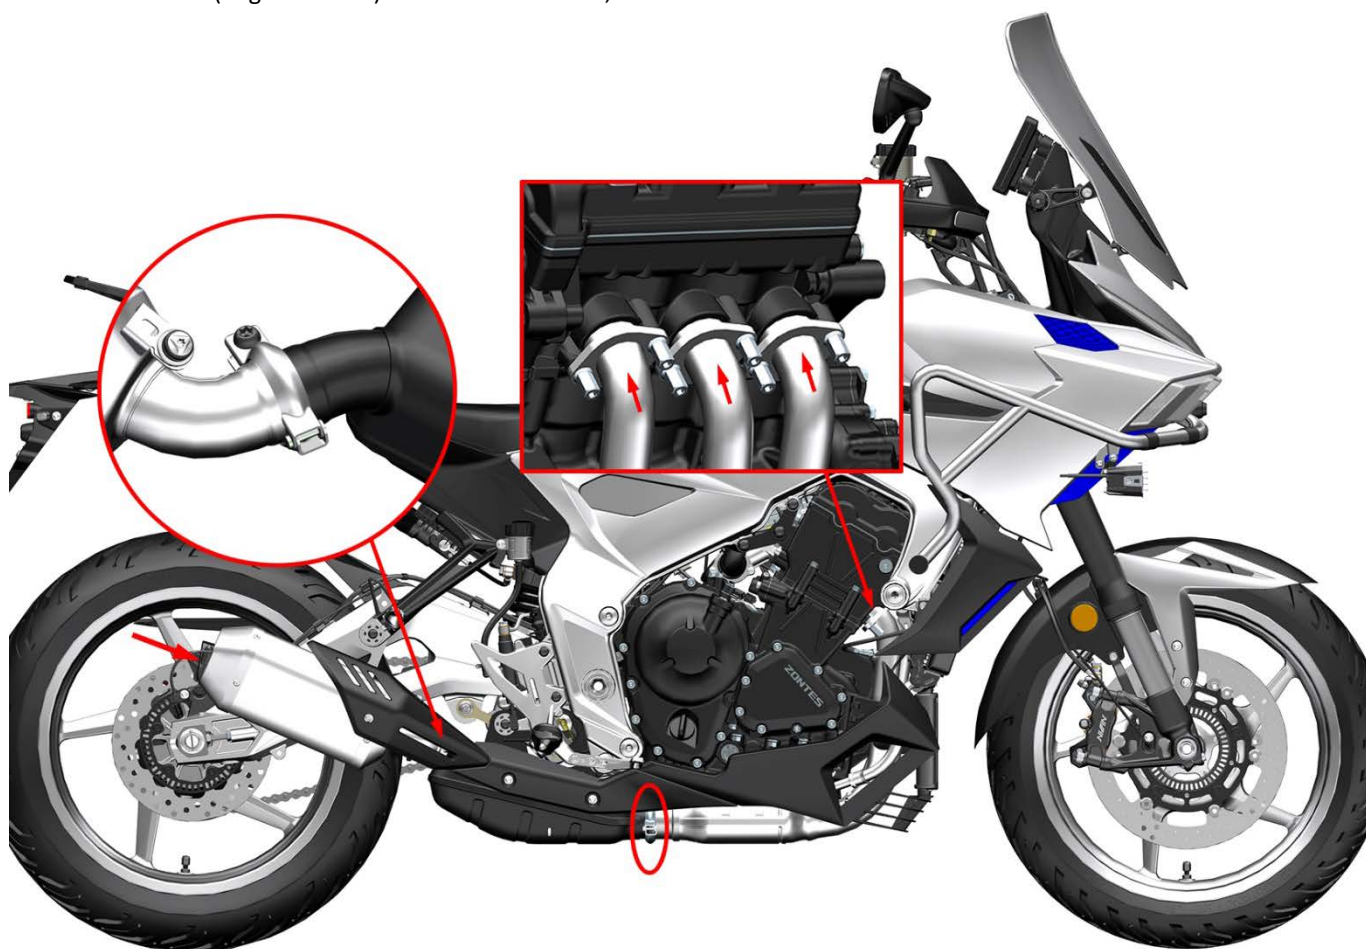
Standard torque for clamp bolts and exhaust port nuts: 25 N·m
